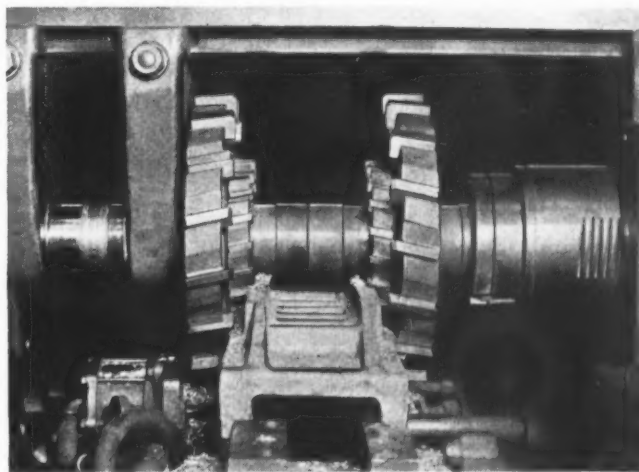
Milling the Top and Two Sides of Cast-iron Cross-head Gibs for Steam Locomotives
